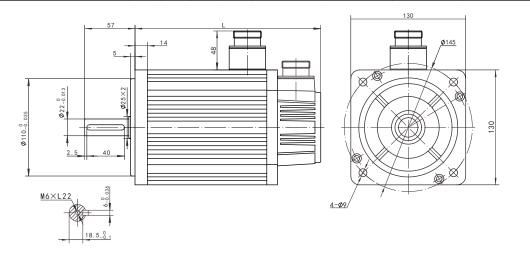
Installation dimension drawing of WE series 130 flange servo motor
